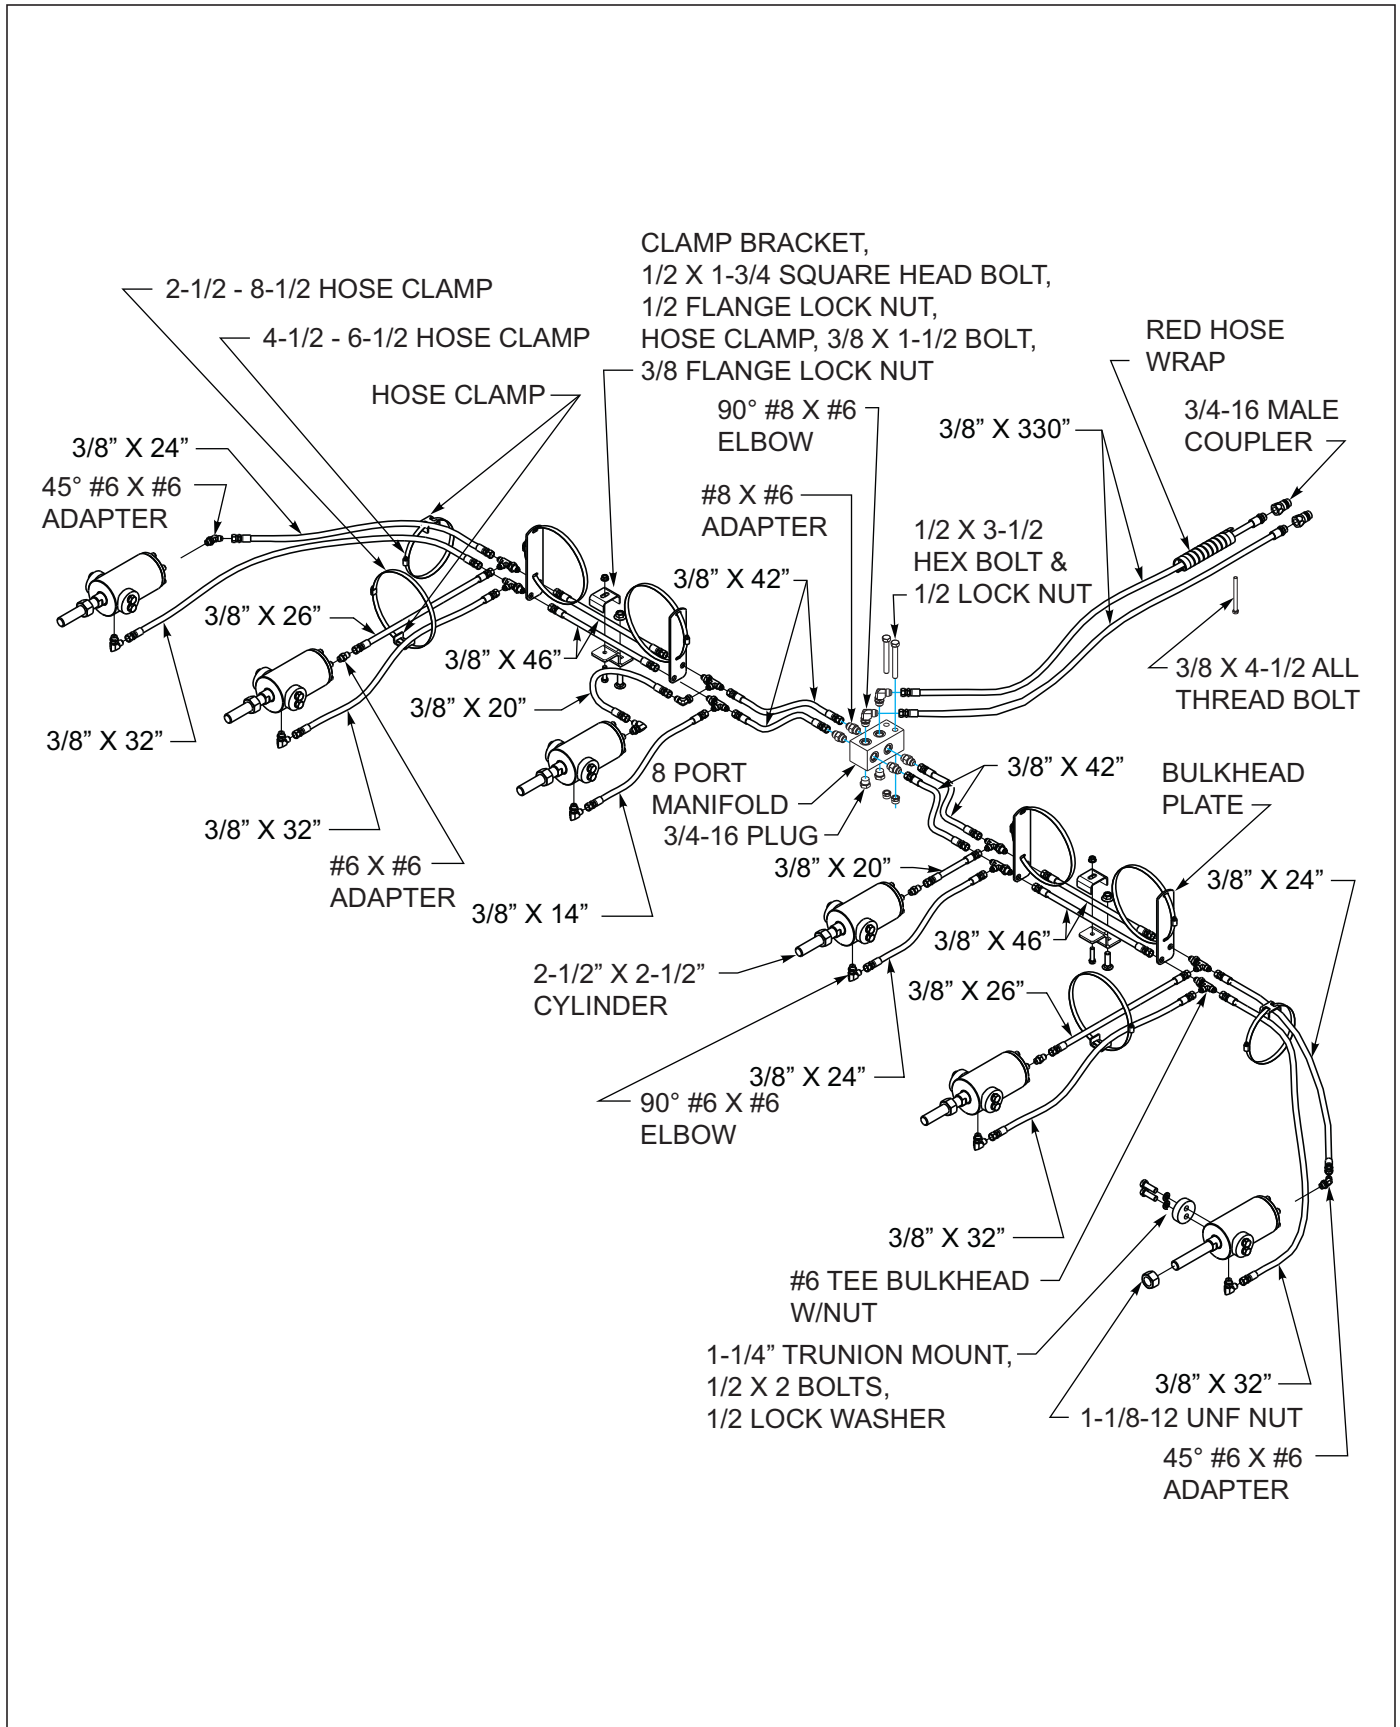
8 Port Manifold Installation 29', 33', 36'
